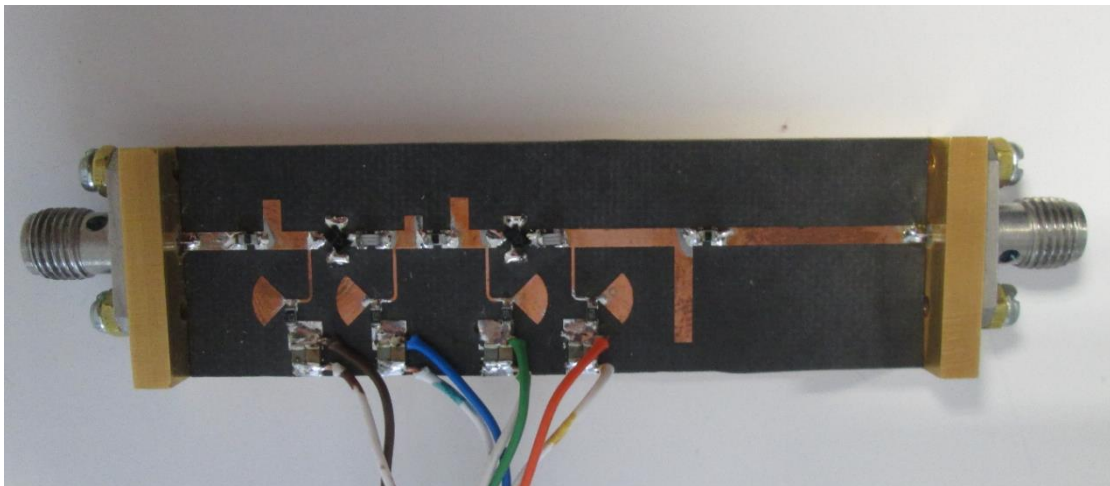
Complete assembled board with dimensions 20 x 64 mm.
